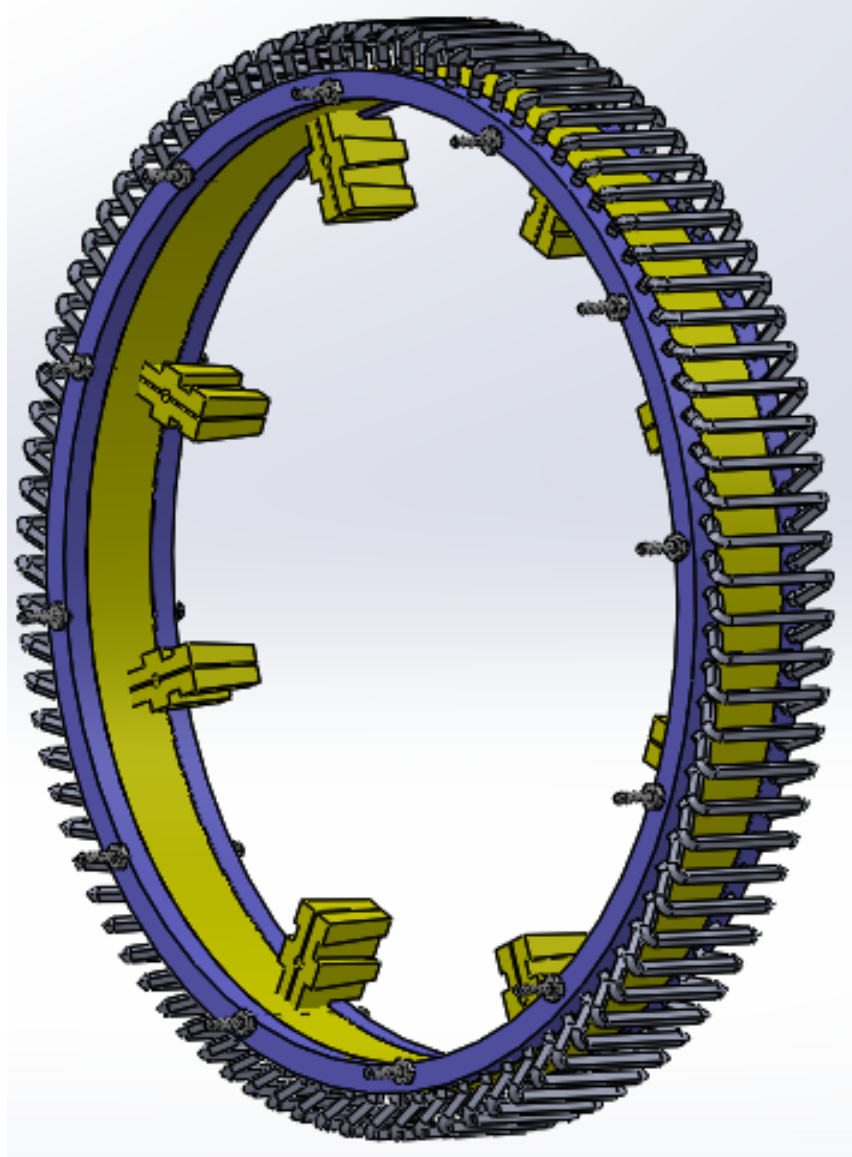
Side Rings, Center Ring, and Internal Passage Molds
